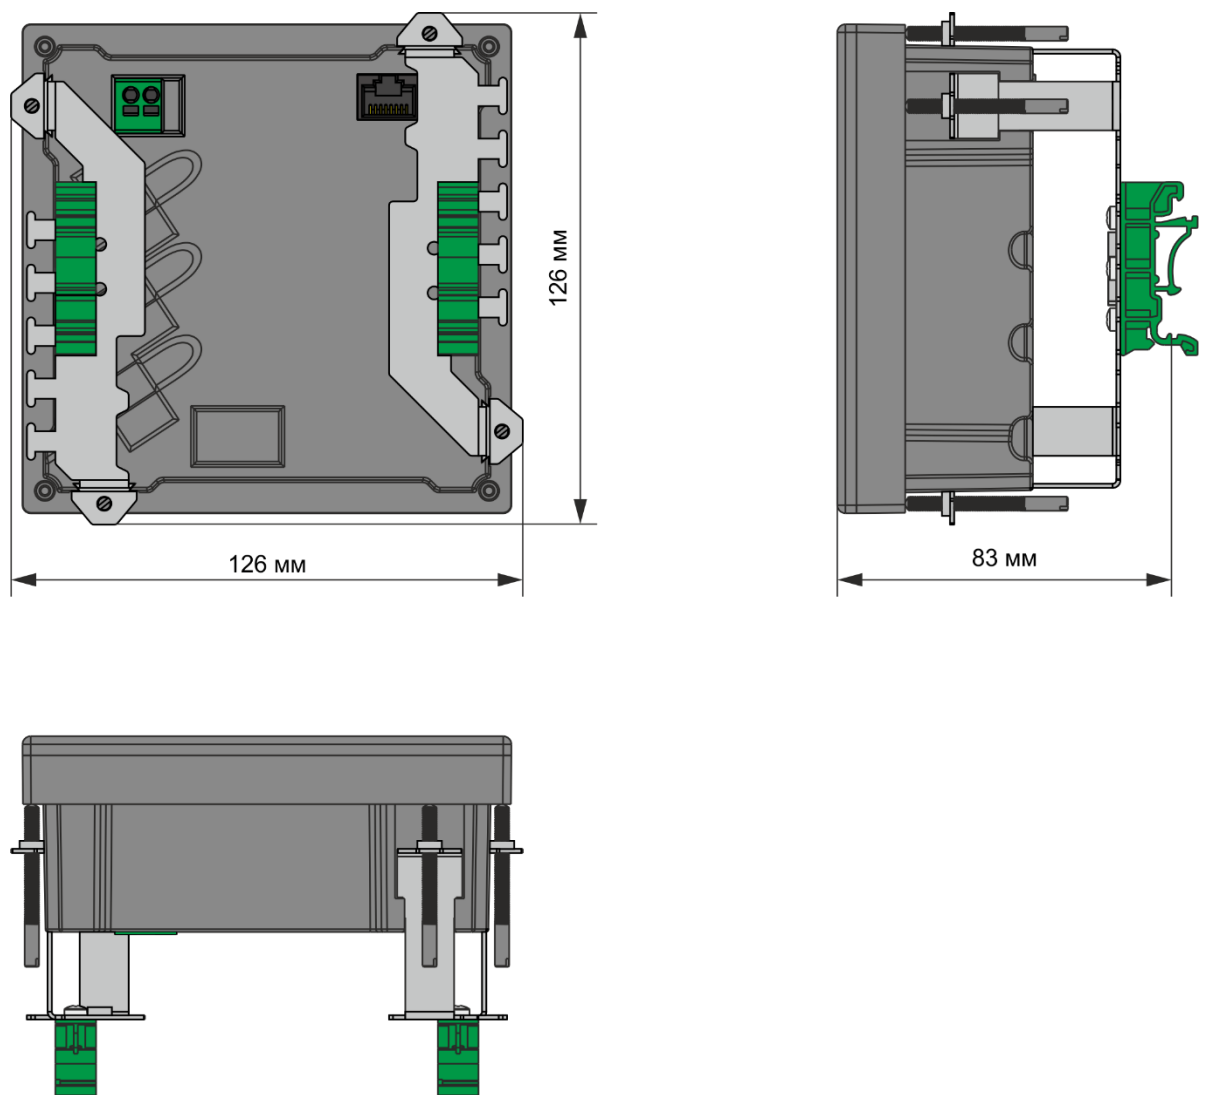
ENMI-X-24-2 with a bracket for mounting on a DIN rail dimensions in mm
